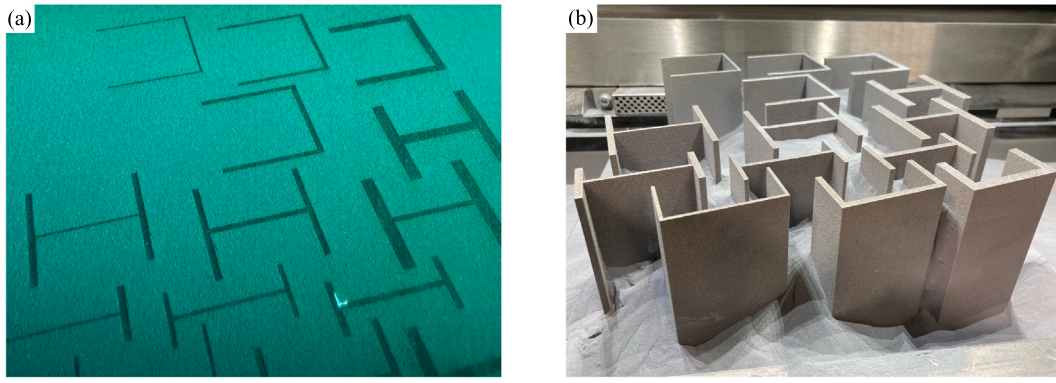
I- and C-section stub columns: (a) during printing; (b) as manufactured on the building plate.
